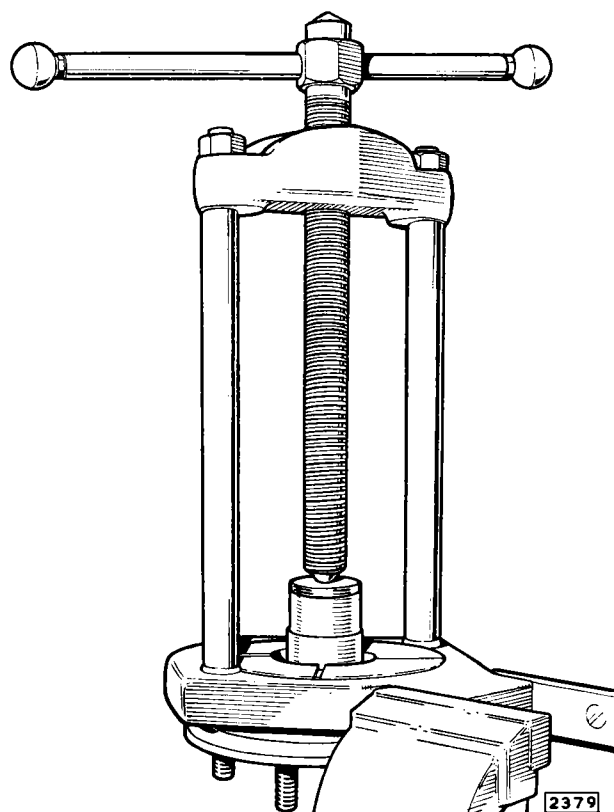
Removing the inner race from the hub using Churchill Tool No. SL.14 with adaptor SL.14-7
